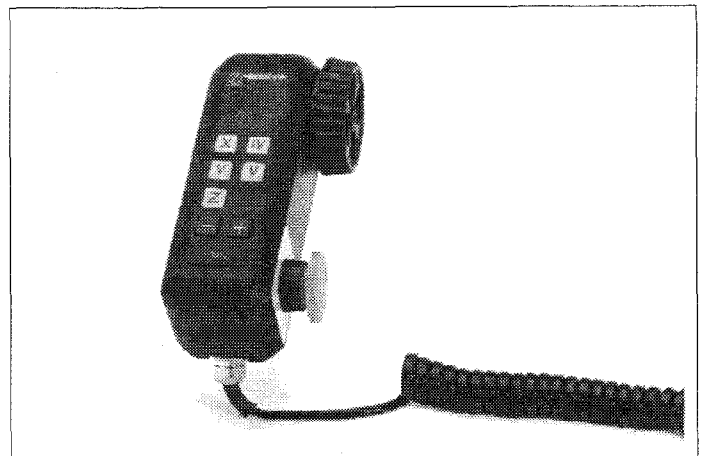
HEIDENHAIN HR 330 electronic handwheel
